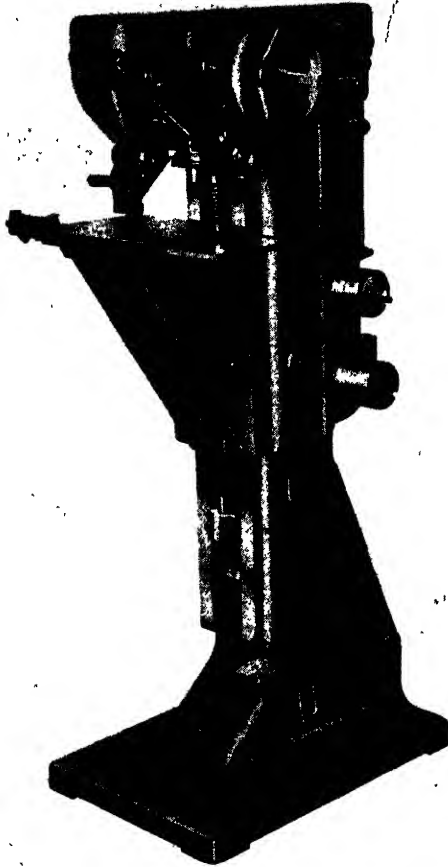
THE VICKERS HARDNESS TESTING MACHINE
